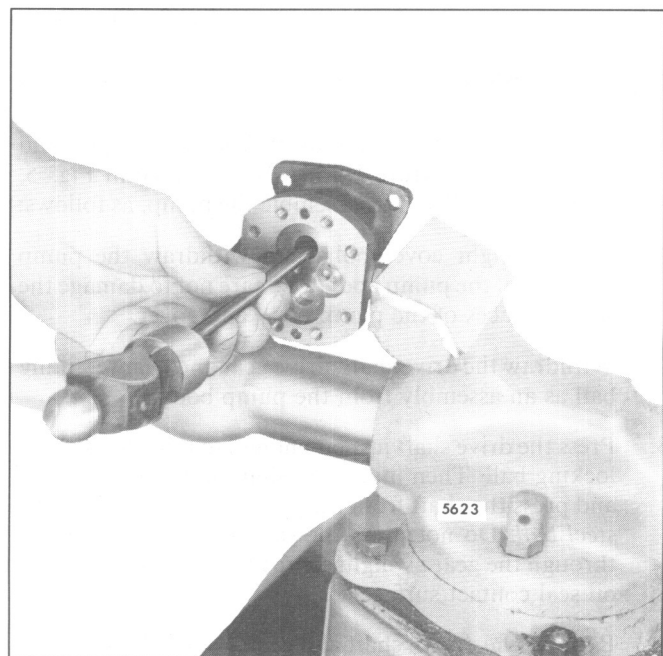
Removing Oil Seals using Tool J 1508-13
